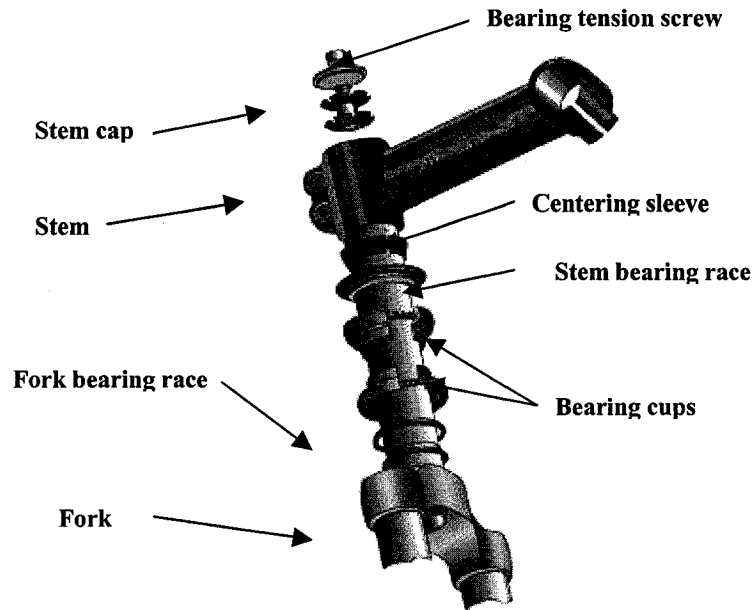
The threaded fork headset [11] and the “7” shaped stem.
